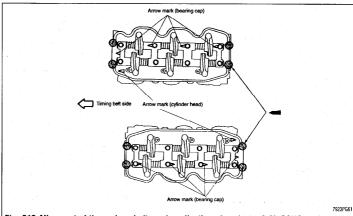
Alignment of the rocker shafts and application of sealant—3.0L SOHC engine
